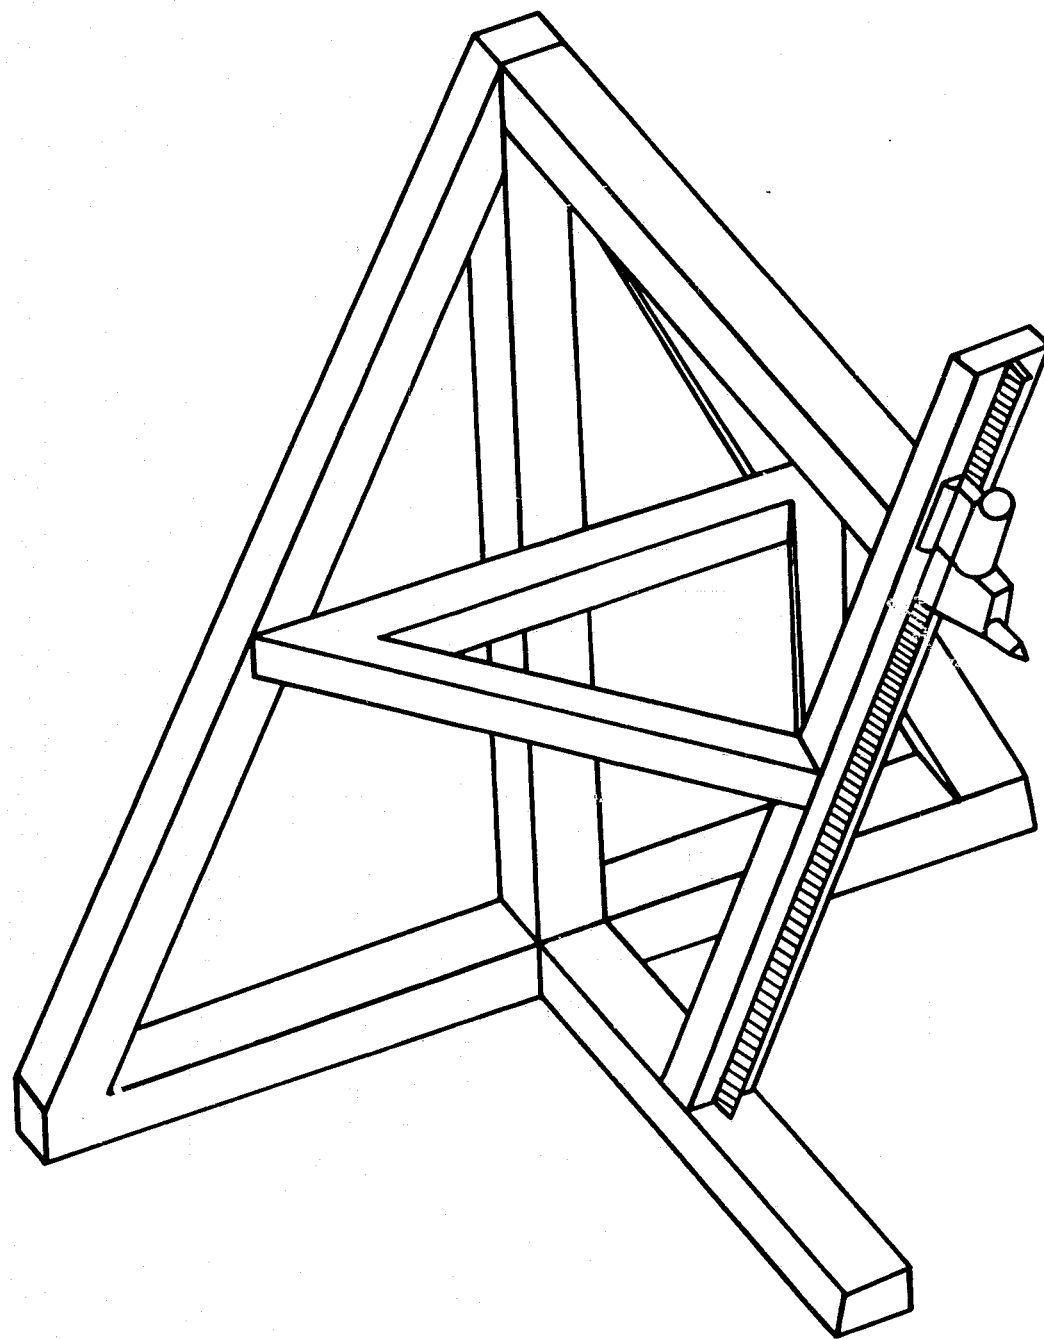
LINE WELDER
